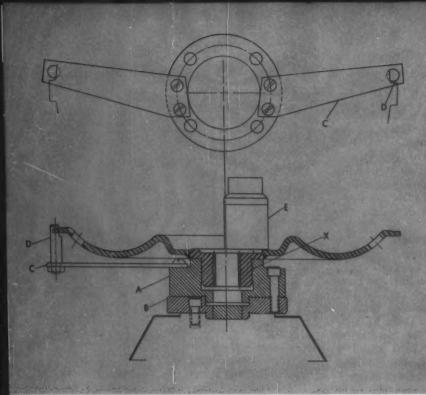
Disc-and-hub assembly (X) is located in adapter (A) and driven by pins (D) mounted on the ends of arms (C). Stone for Superfinishing end face of the rear hub is seen at (E).
